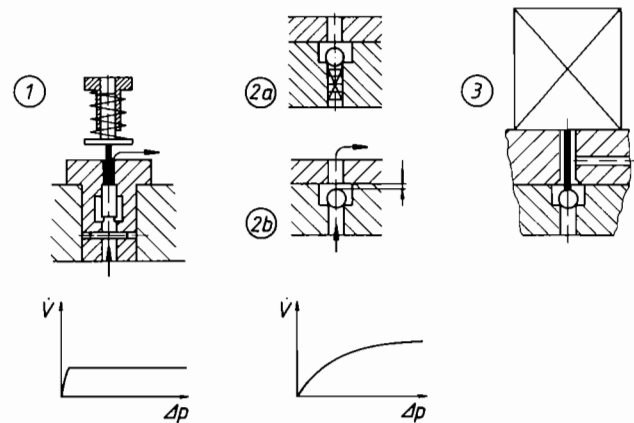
Venting Systems for Hydraulic Diaphragm Pumps. 1) volumetric piston venting valve, 2a) bleeding valve (throttling system, check valve), 2b) bleeding valve (double seat ball valve), 3) solenoid bleeding valve.
